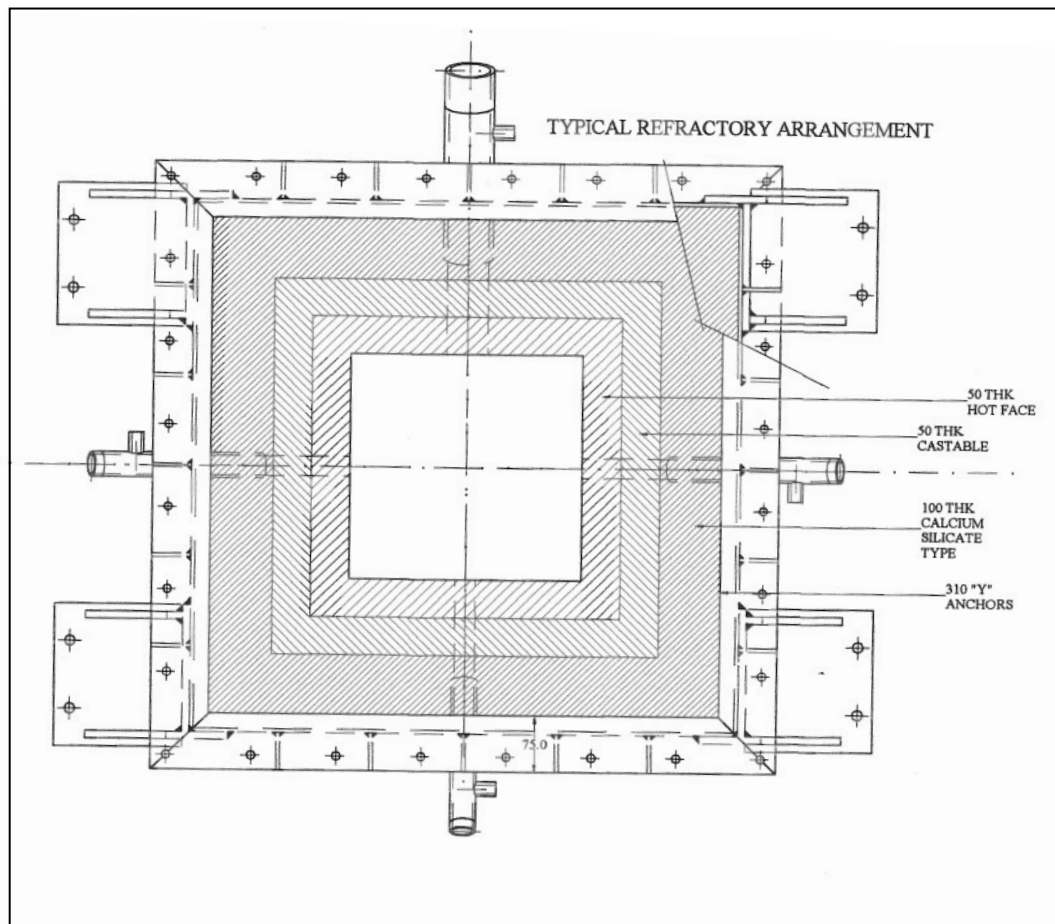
Drawing illustrating the cross-section through the PFC chamber and the typical refractory arrangement.
